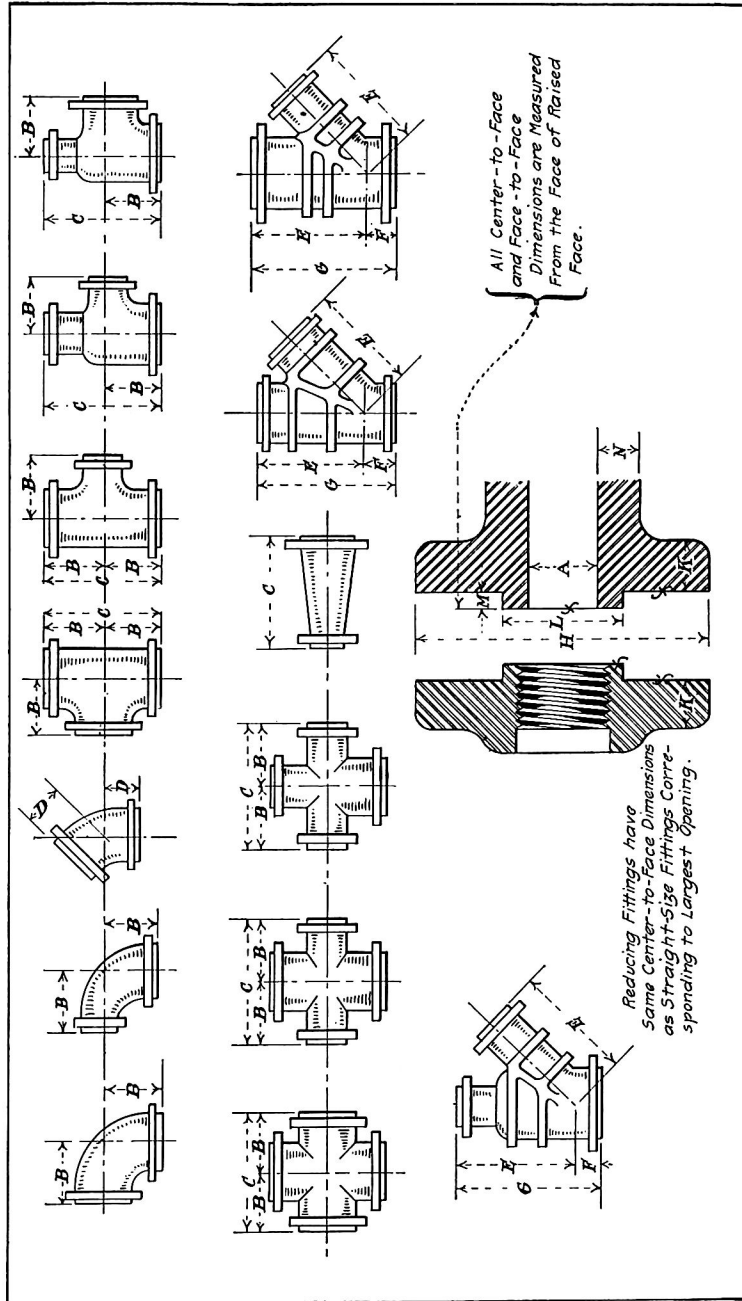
HYDRAULIC AMERICAN STANDARD FLANGES AND FLANGED FITTINGS DIMENSIONED IN TABLES 2, 3 AND 4
